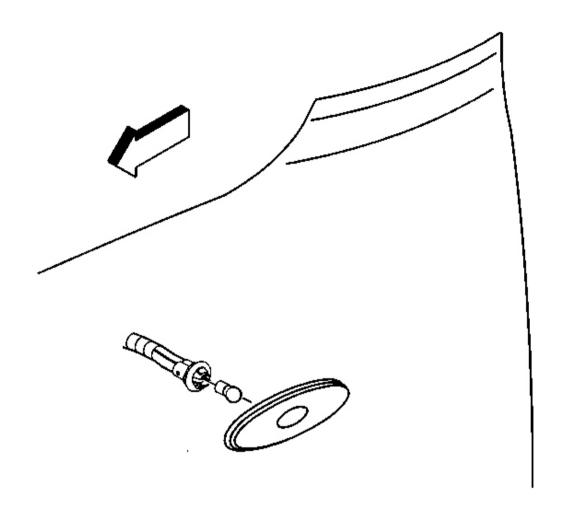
Front Side Repeater Lamp Socket To Front Side Repeater Lamp Assembly & Wheelhouse Filler Panel
